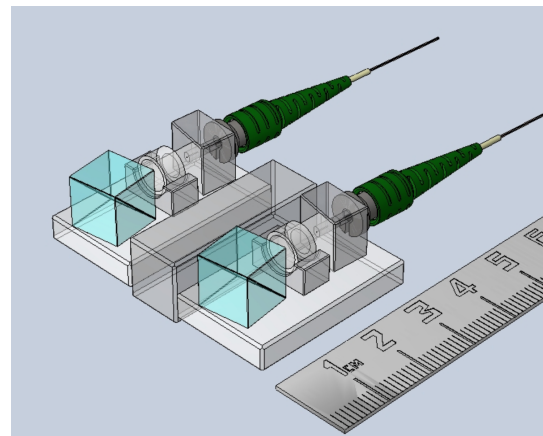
A 3D CAD drawing of the twin pair FIOSs with their mount for coupling the two beams onto the OB together, reprint from Reference [30].
